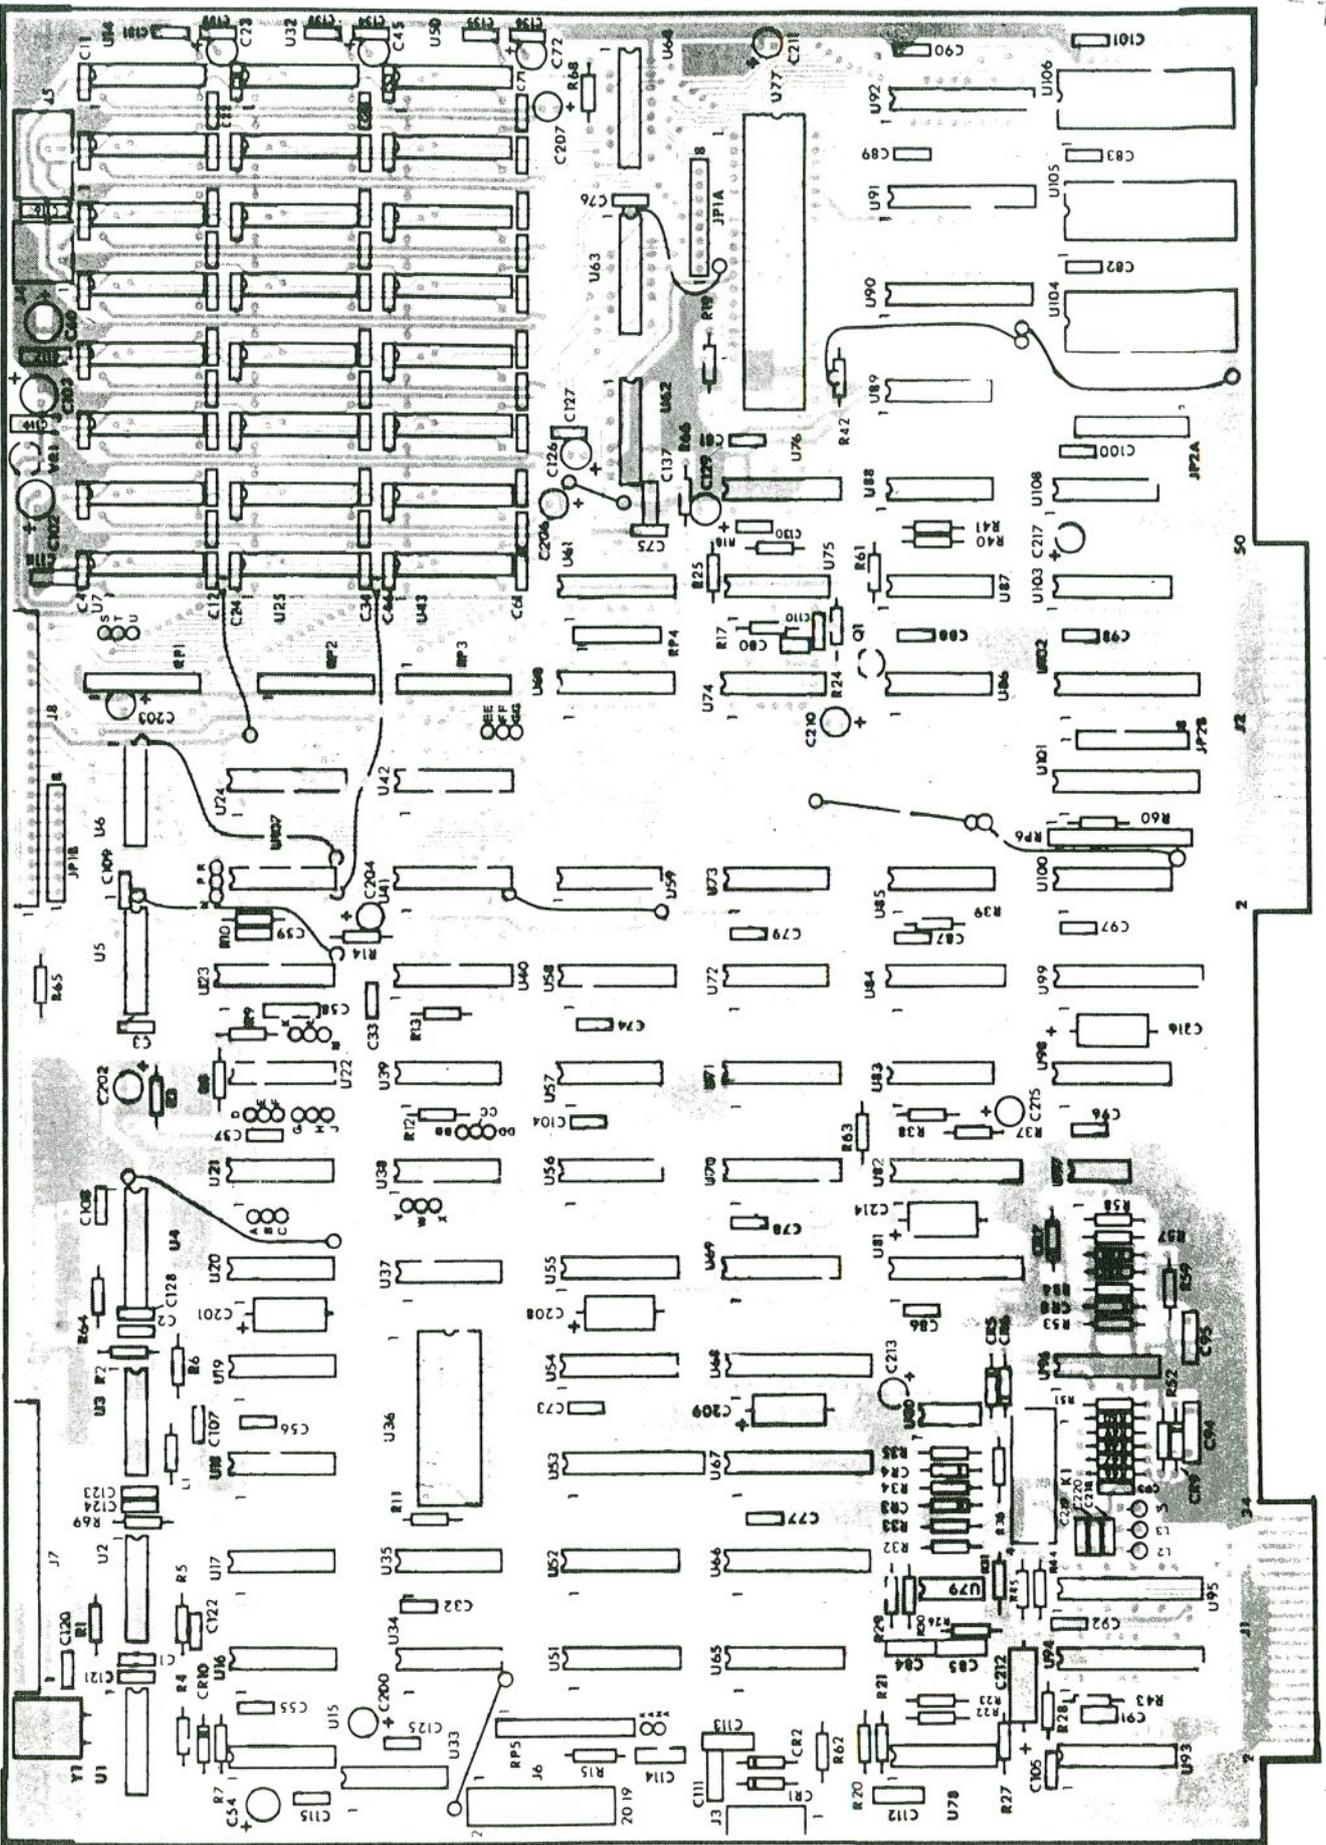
CPU PRINTED CIRCUIT BOARD – COMPONENT SIDE
